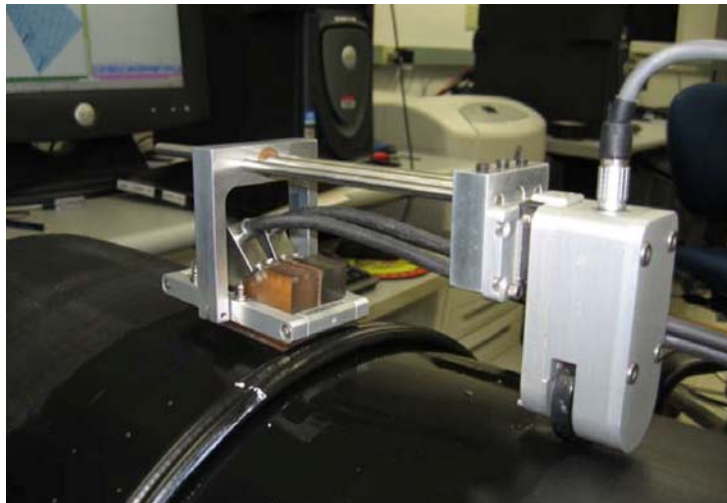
Manual Phased Array Probe Assembly in Position to Inspect a Fusion Joint
